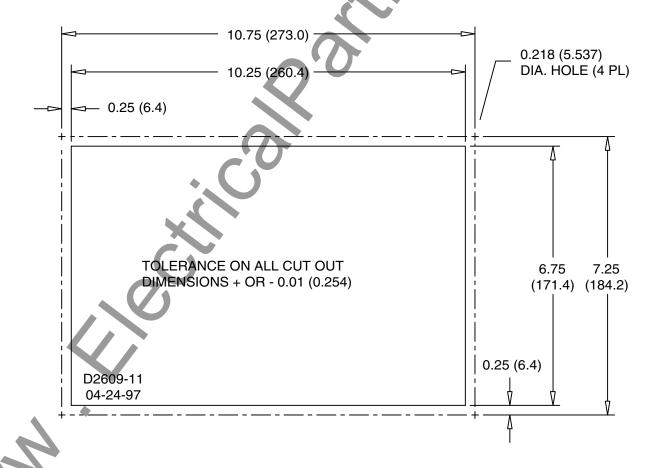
Cutout Dimensions In Inches (Millimeters)
